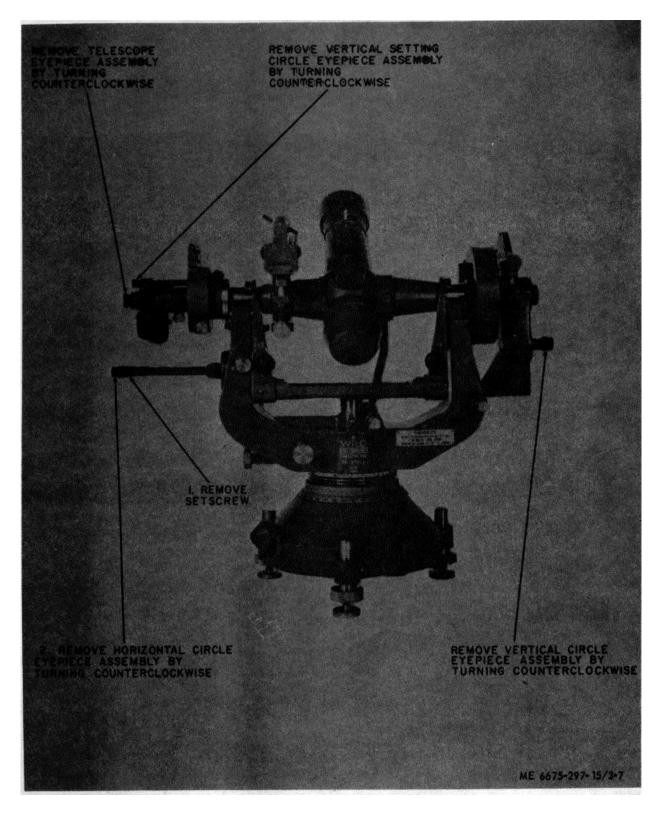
Telescope and microscope eyepiece assemblies, removal and installation.
